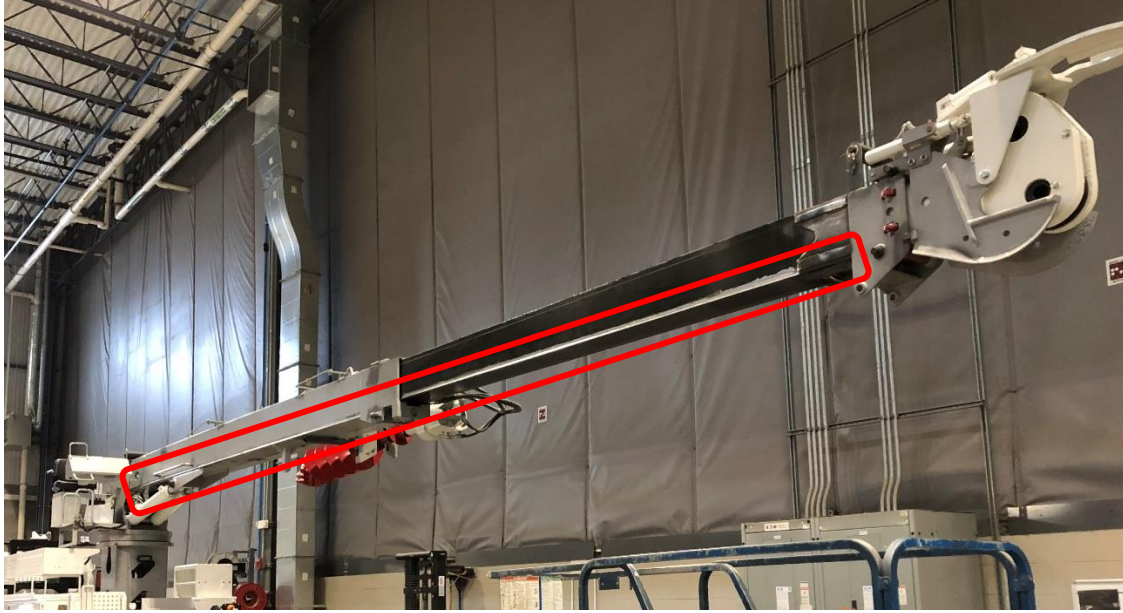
C4000, C5000, C6000, & C7000: Weld to Inspect
